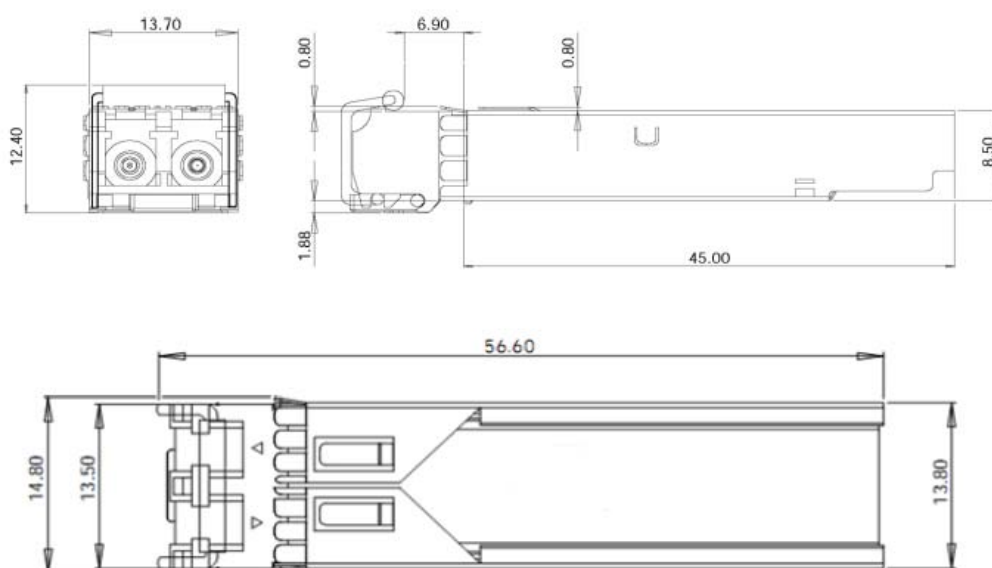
2.5Gb/s SFP Mechanical Dimensions
